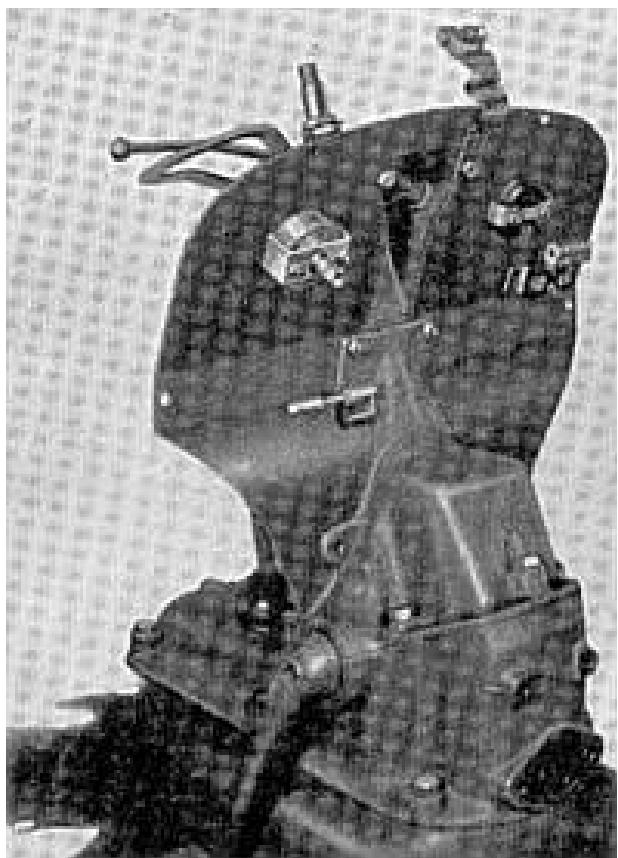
Models 2N-9N steering gear unit with attached instrument panel.
